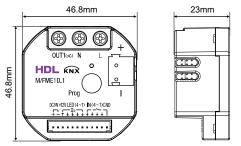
Dimensions - Front View Figure 3. Dimensions - Side View
